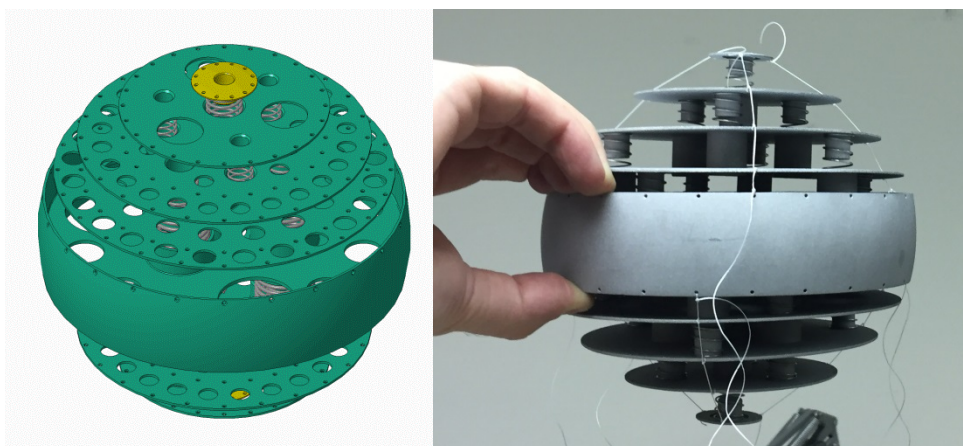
Deployed probe sphere. Drawing at left and photo at right. Thin tethers prevent the probe from overextending while uncovered.
